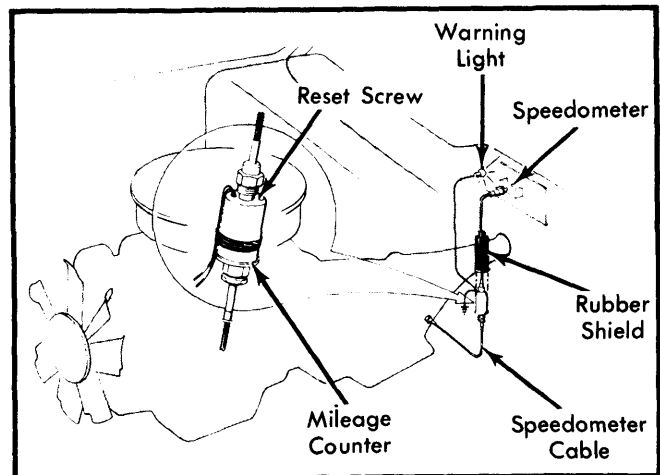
Oxygen Sensor Lamp Mileage Counter (Mechanical Switch Shown)
